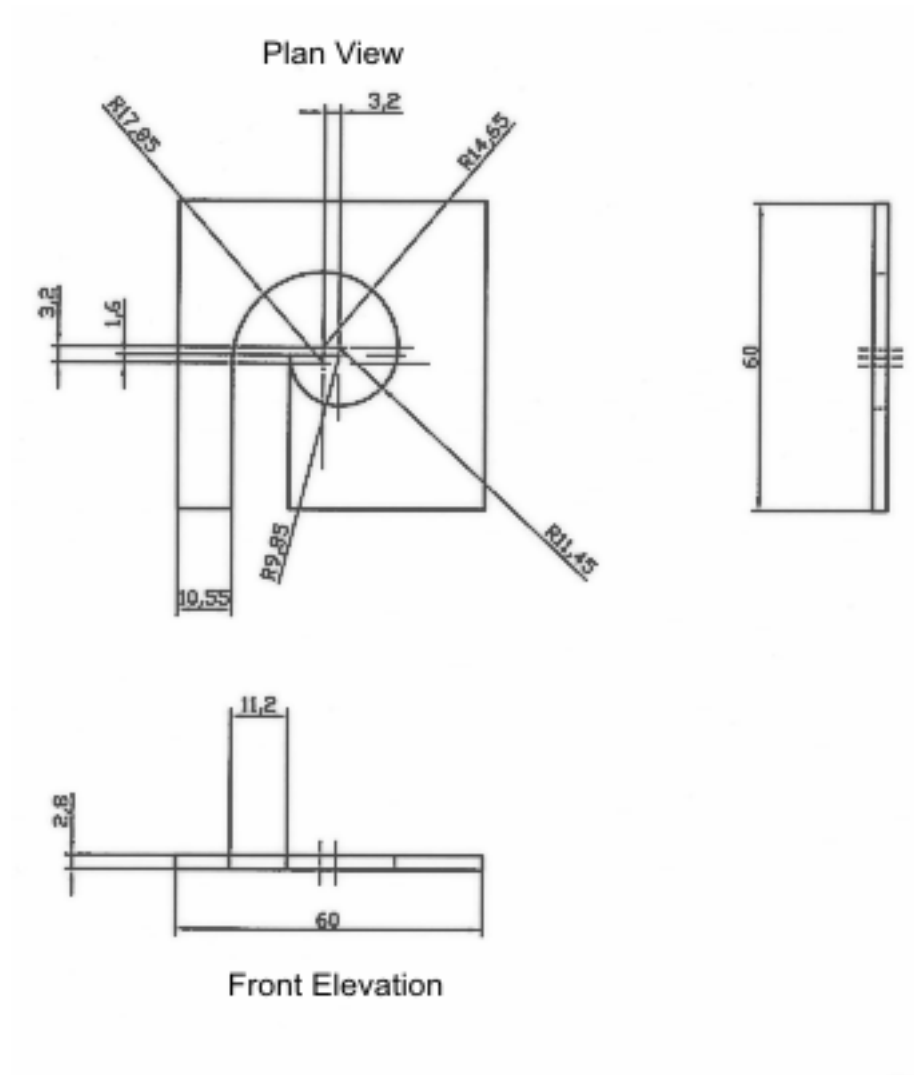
Plan view and front side elevation of Perspex slice forming outlet involute
